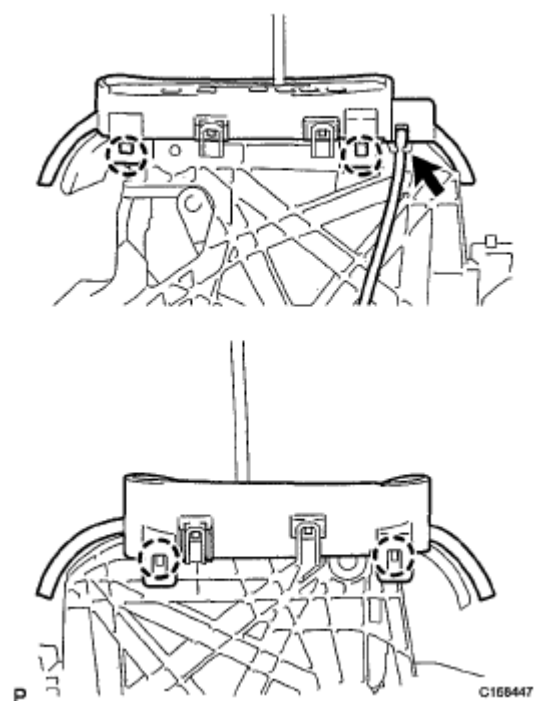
Identifying Wire Harness Clamp And Shift Lock Control Unit
